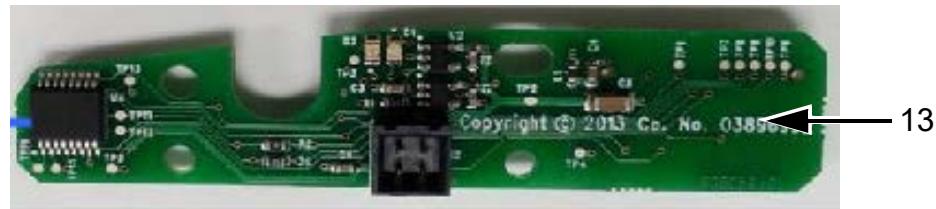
Gap Sensor and Print Roller Sensor PCB
